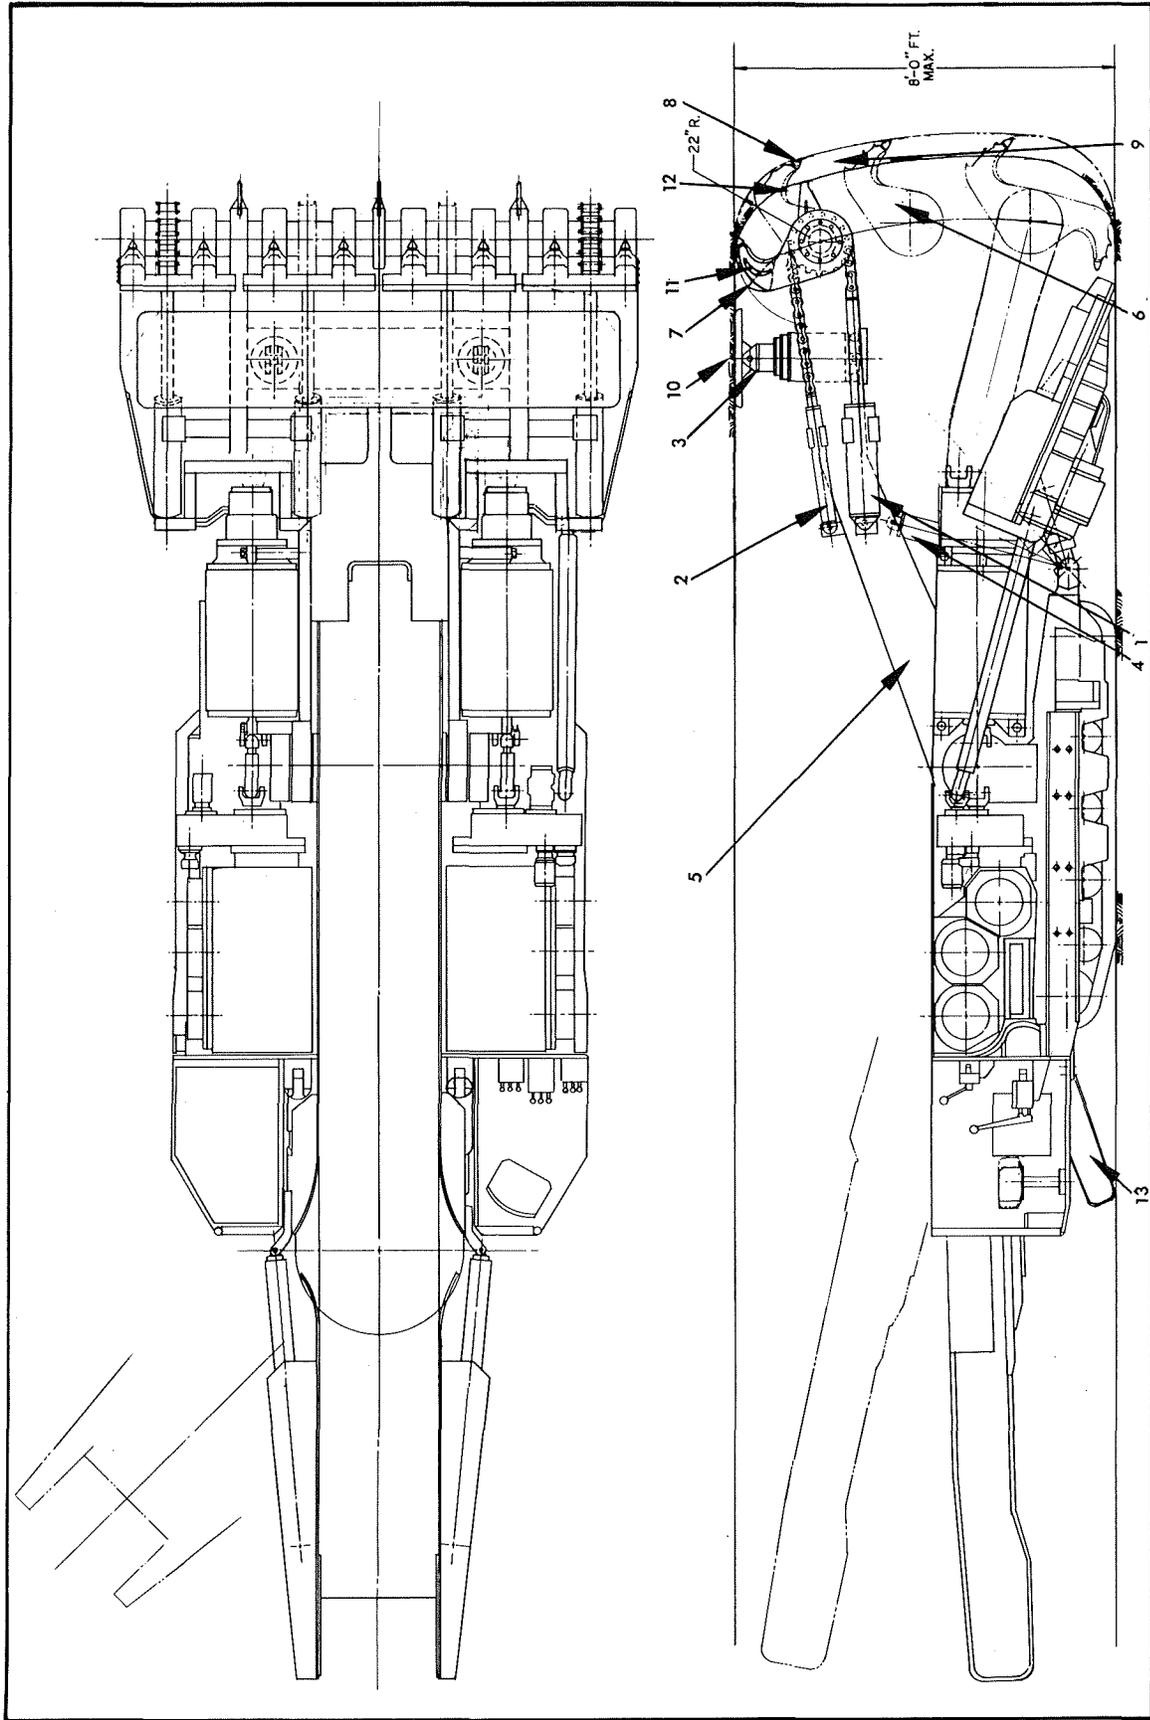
LAYOUT DRAWING, SELF-SUMPING HEAD CONCEPT
